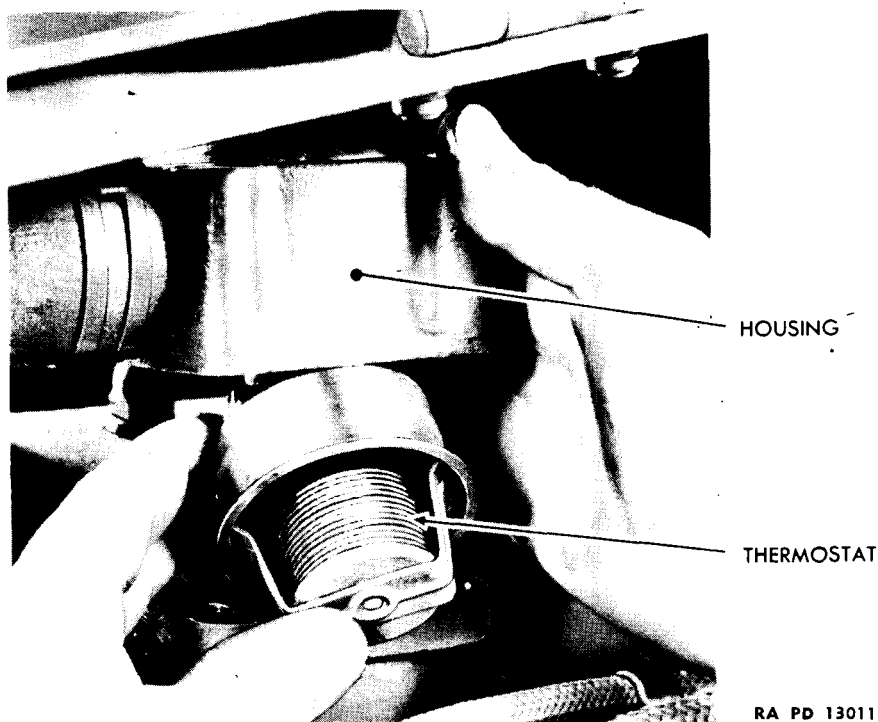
Removal of Thermostat - (Hercules Diesel)
